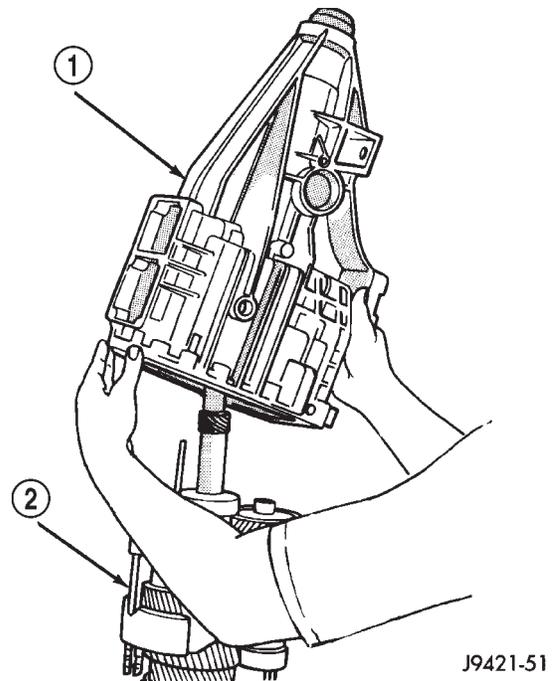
COUNTERSHAFT REAR BEARING SEATED
